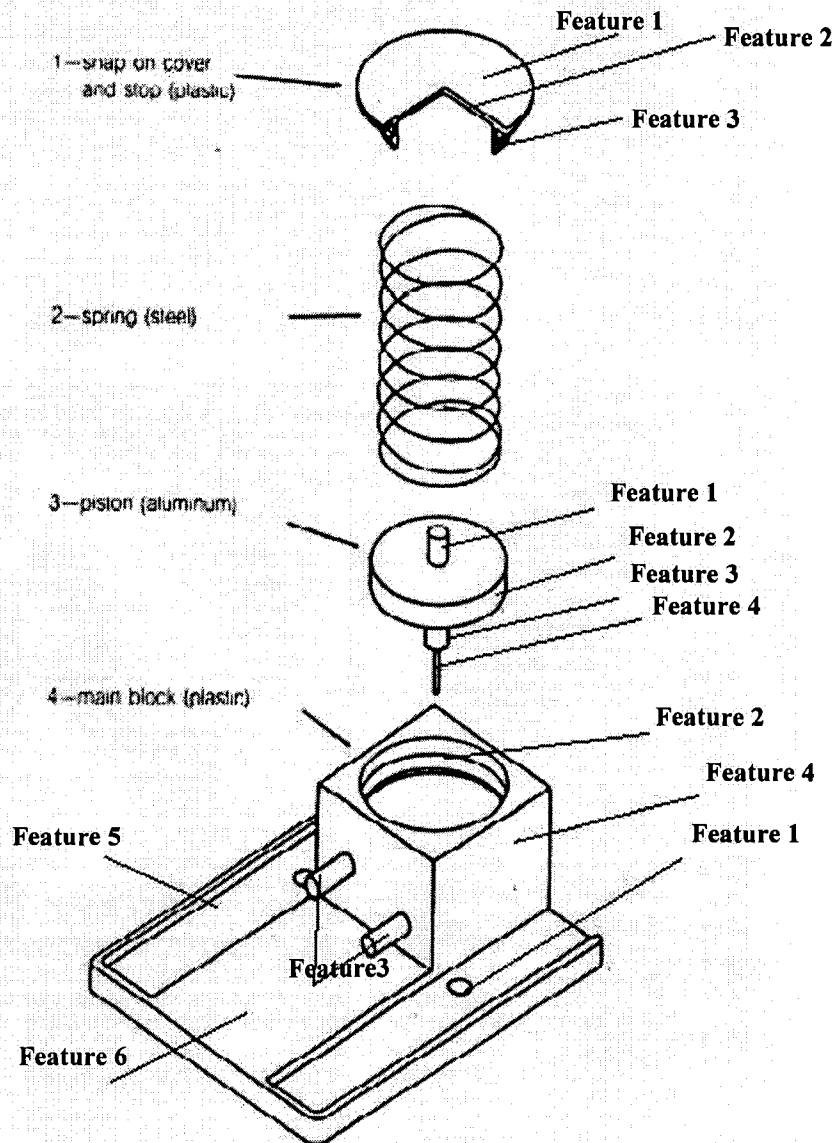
Example 2- Pneumatic piston sub-assembly (After DFA), [Boothroyd and Dewhurst, 1987]
